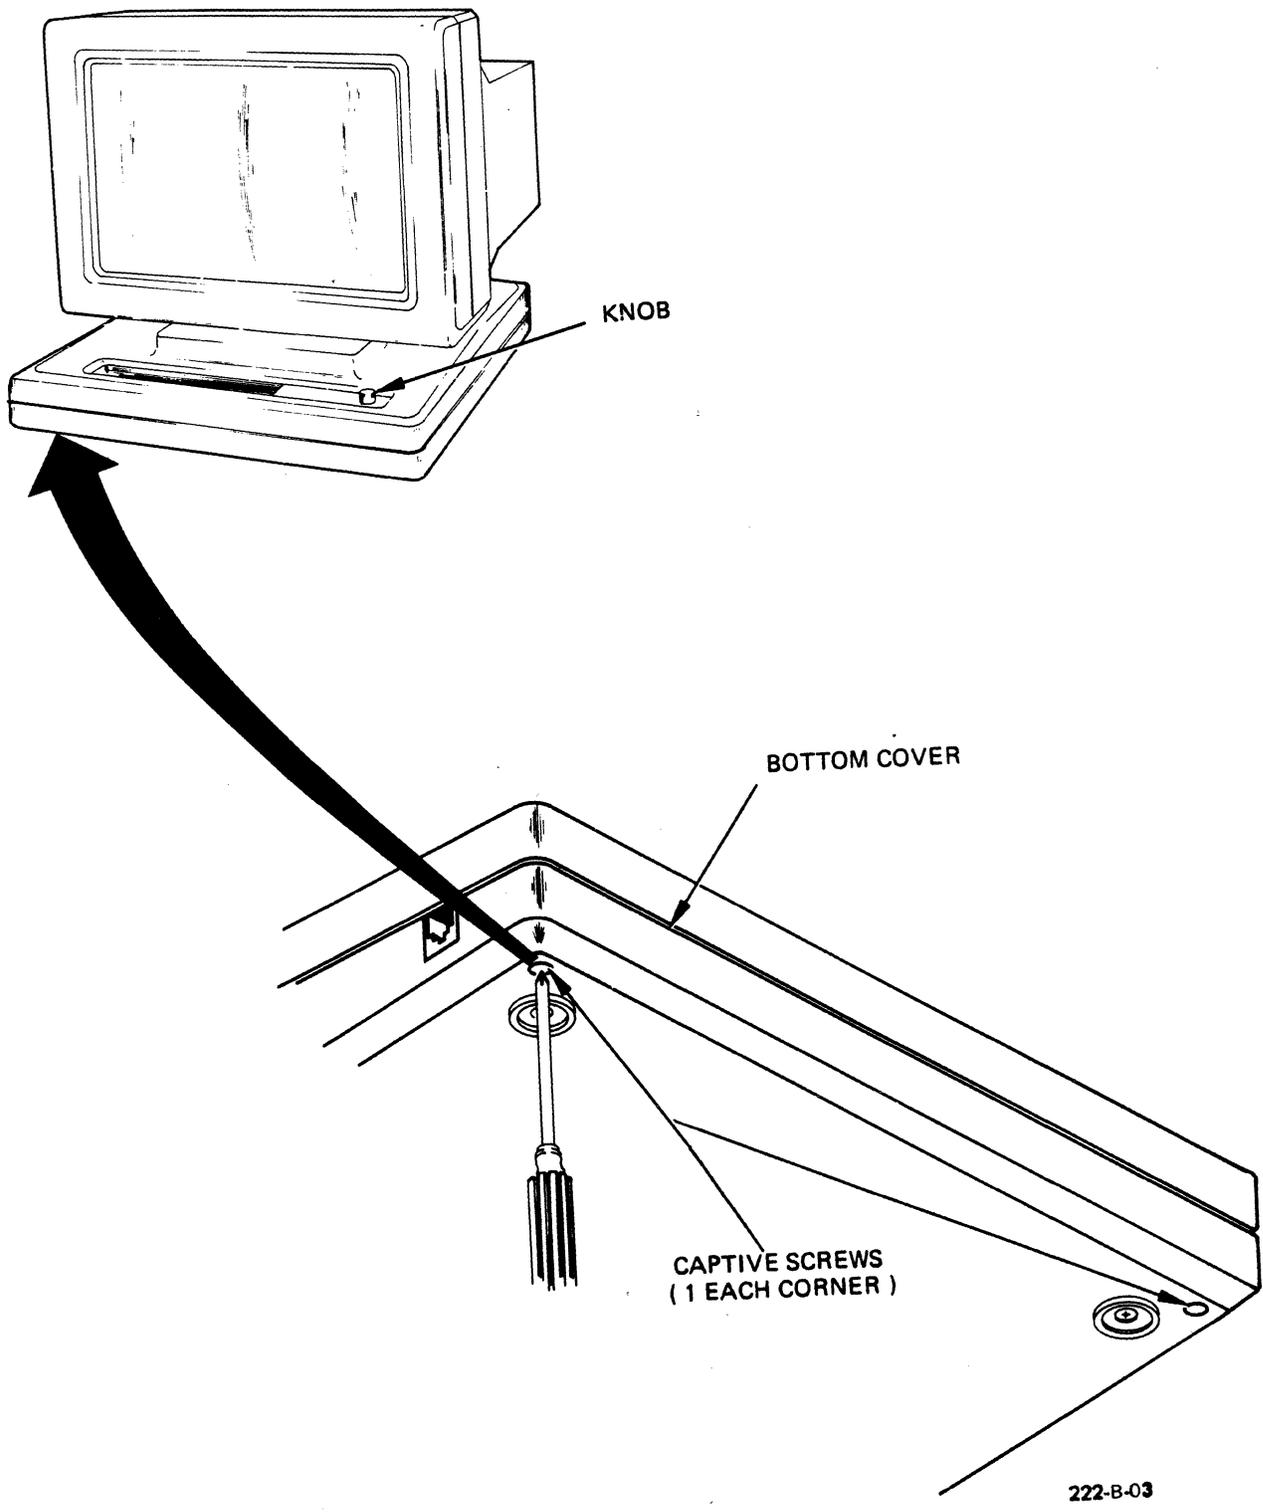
Monitor Bottom Cover Removal and Replacement
